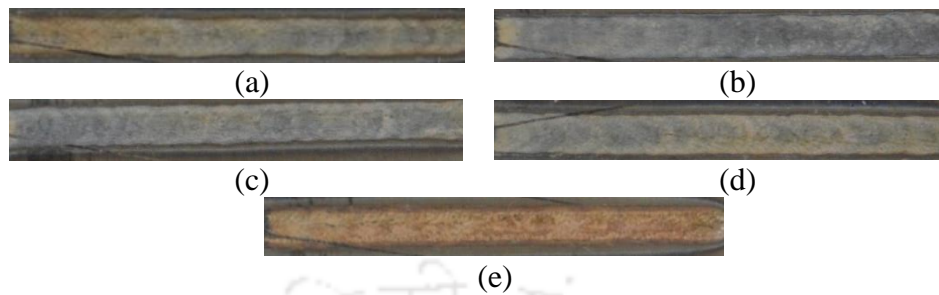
Weld bead appearances at (a) 1500 W, (b) 1600 W, (c) 1700 W, (d) 1800 W and (e) 1900 W beam power
